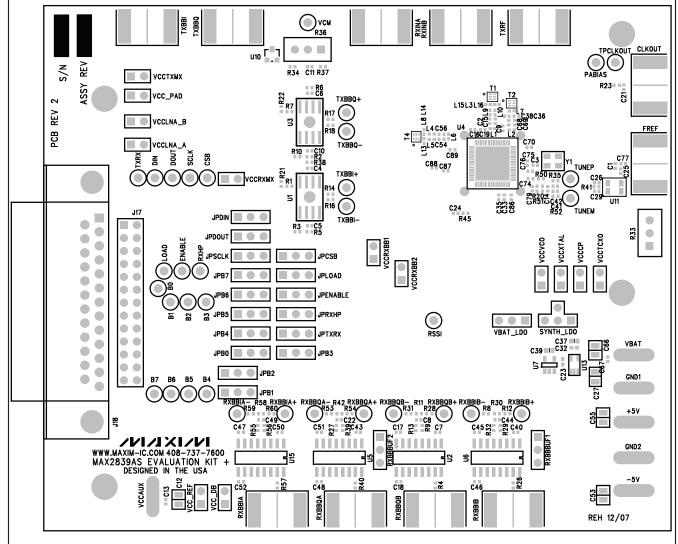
MAX2839AS EV Kit PCB Layout—Top Silkscreen
